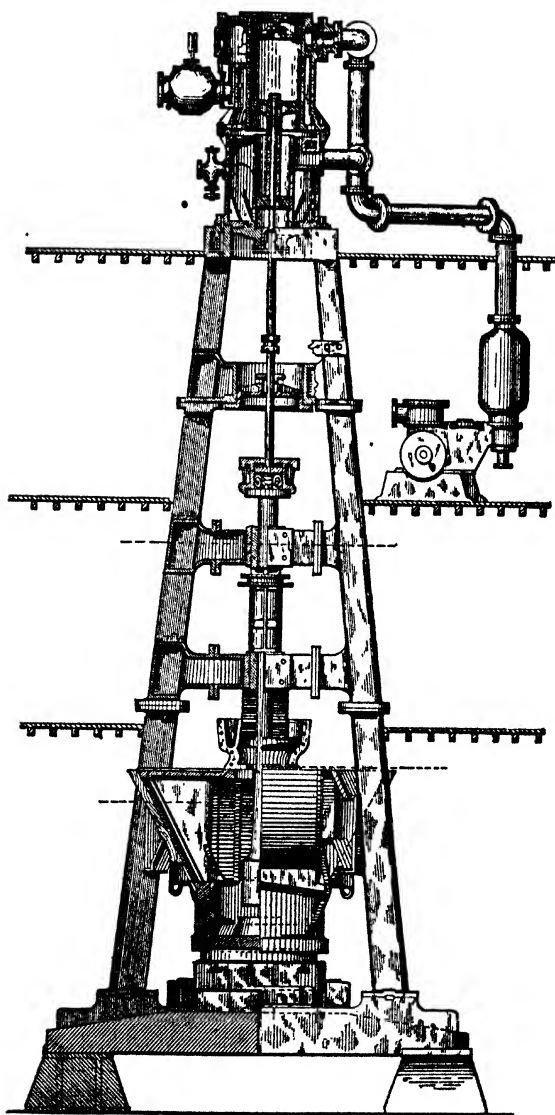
Leavitt steam stamp. Elevation, partly in section.
